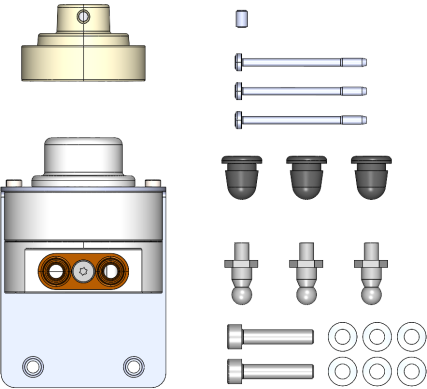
Gear Pump FPE (art. no. 34562331)
